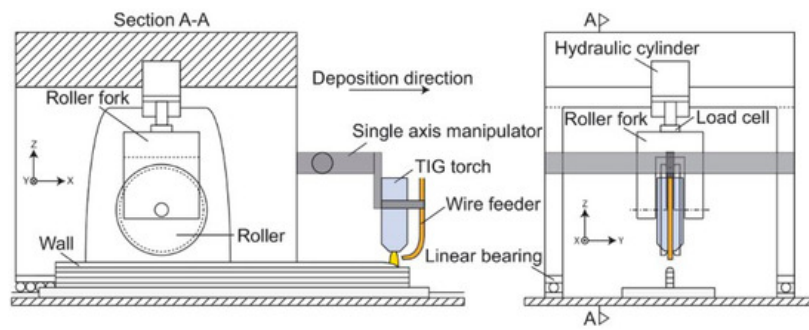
Schematic diagram of rolling and welding equipment [16].
